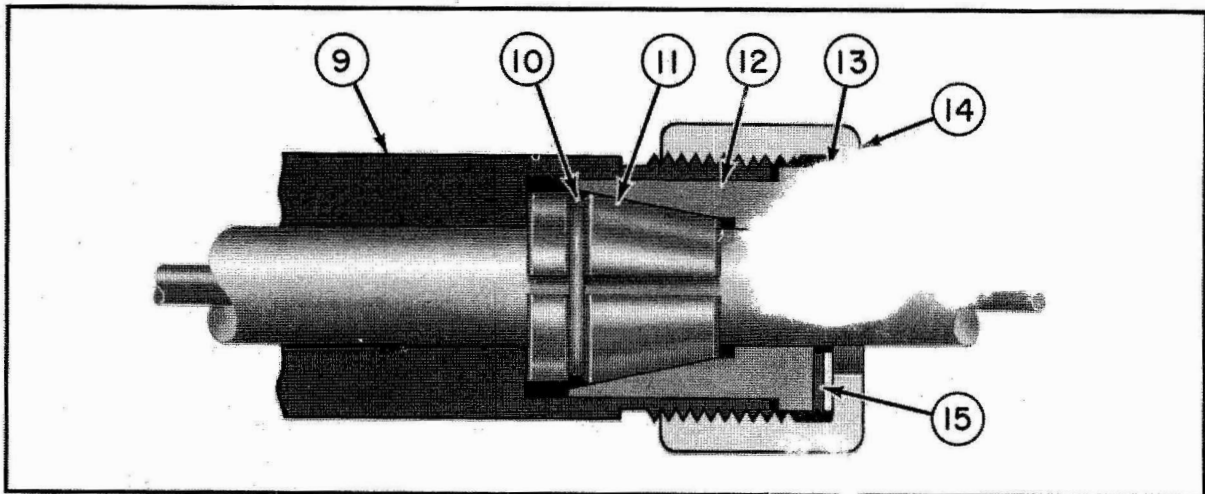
MX-2326/U Partial Assembly, Inboard
